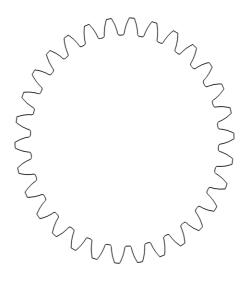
Spur Gear Model with Cuts between All of the Teeth
